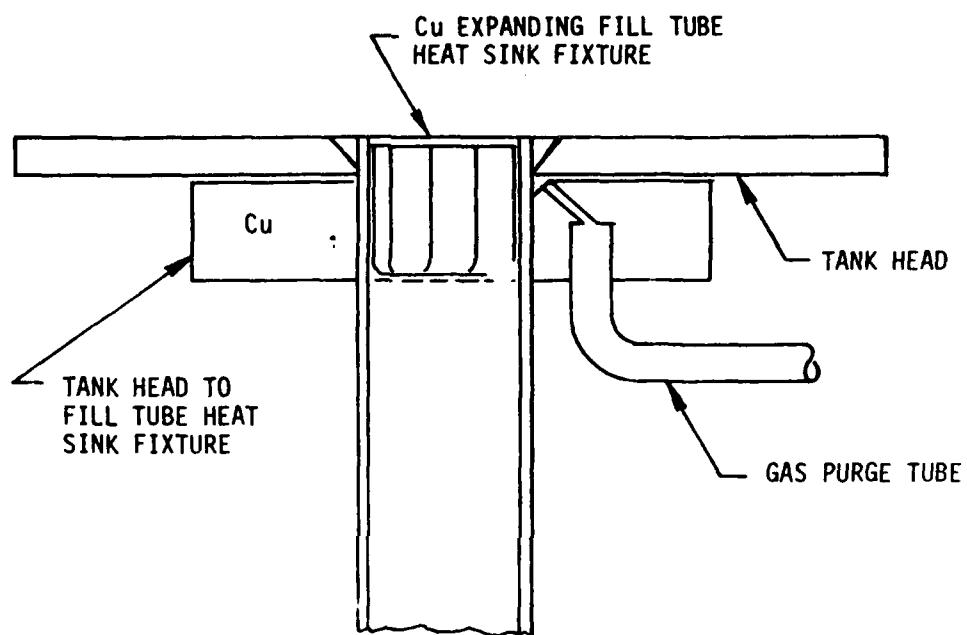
Weld Tooling for Fill Tube to Tank Head Joint
